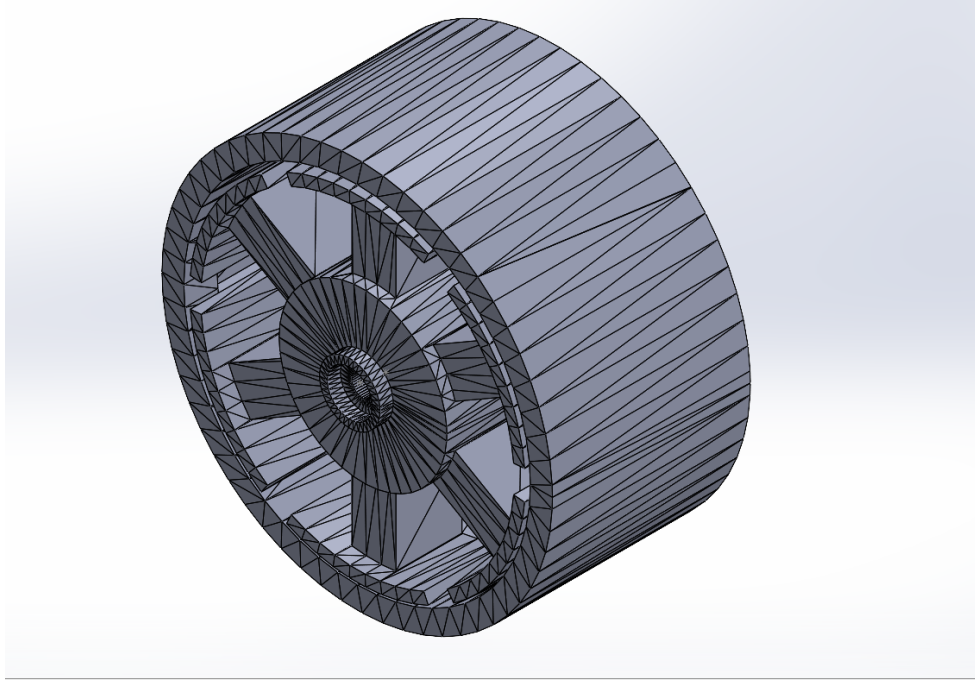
Full SOLIDWORKS assembly of the six slot/eight pole outrunner BLDC motor
